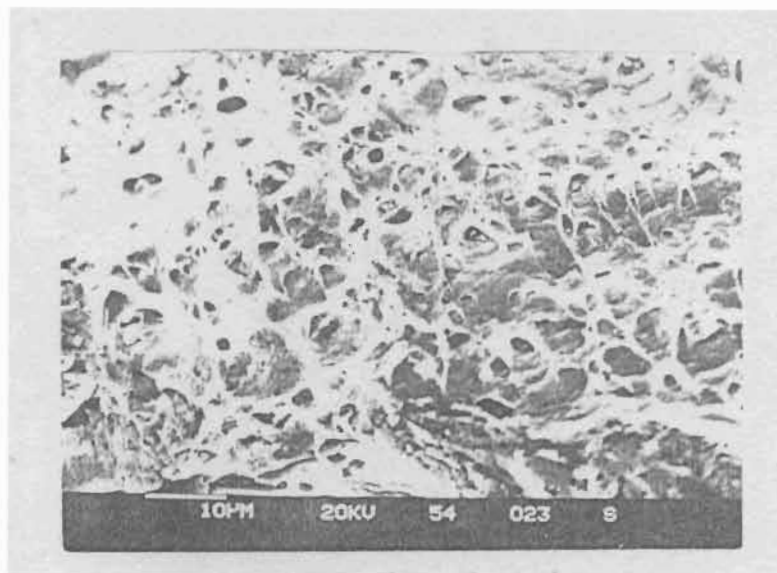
Fractograph of the tensile fracture of the sample at Fig.52. Reveals formation of microvoids over the matrix and failure by brittle shear.
